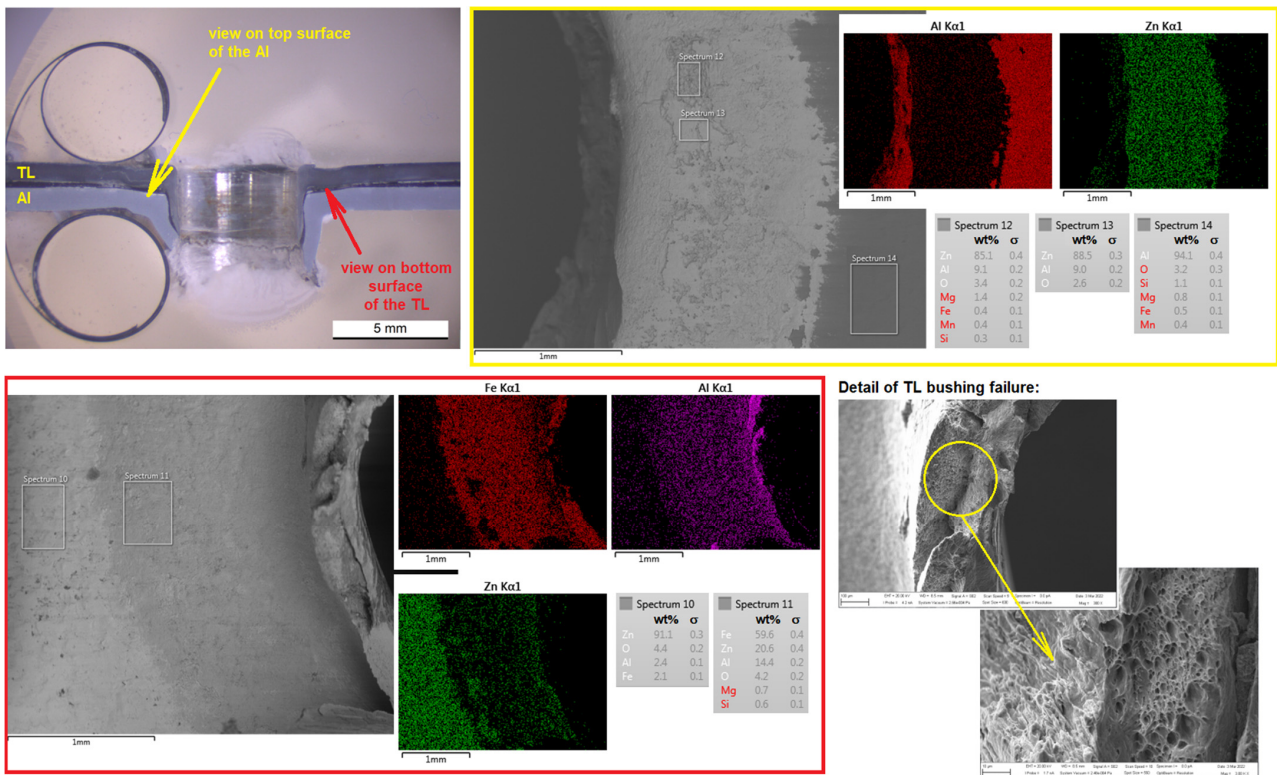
SEM analysis of TL-Al joint, element maps, EDS spectra and fracture surfaces of bushing. The yellow border contains a detailed view on the top surface of the lower material. The red border contains a detailed view on the bottom surface of the upper material.
